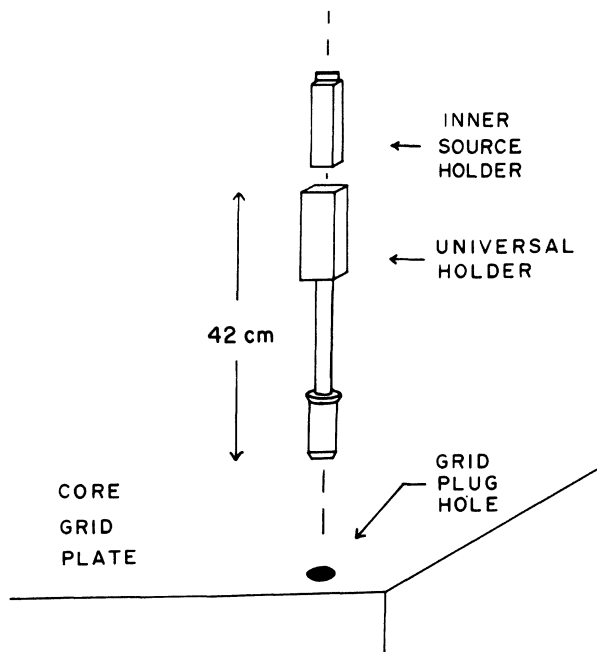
Exploded view of the outer (universal) source holder and inner source holder. The nickel source material contained in the inner holder is not shown.
